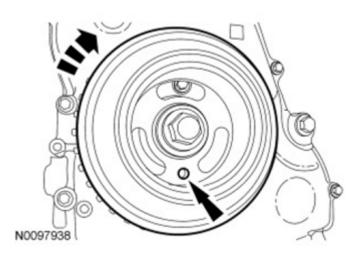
Locating Crankshaft Pulley Hole Courtesy of FORD MOTOR CO.
